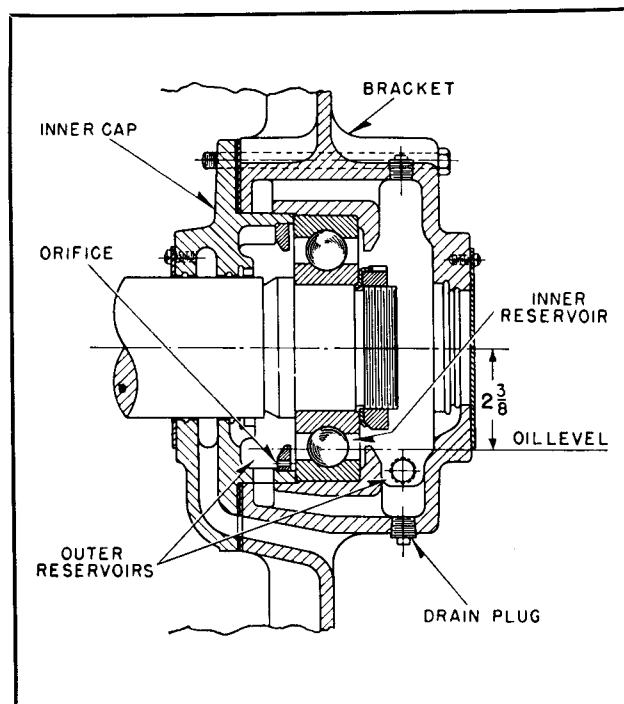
Typical Ball Bearing (Oil Lubricated)
